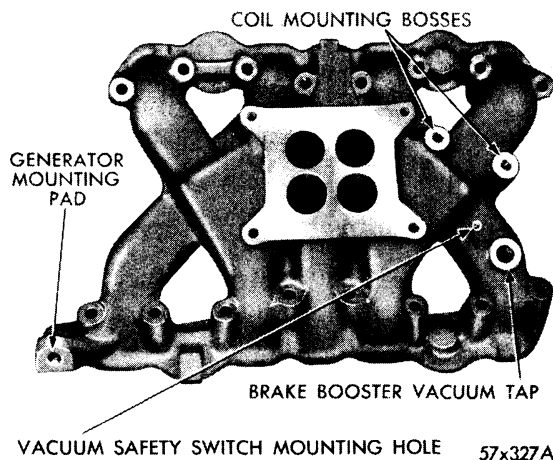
Intake Manifold (LC2, LC3, LY1)
